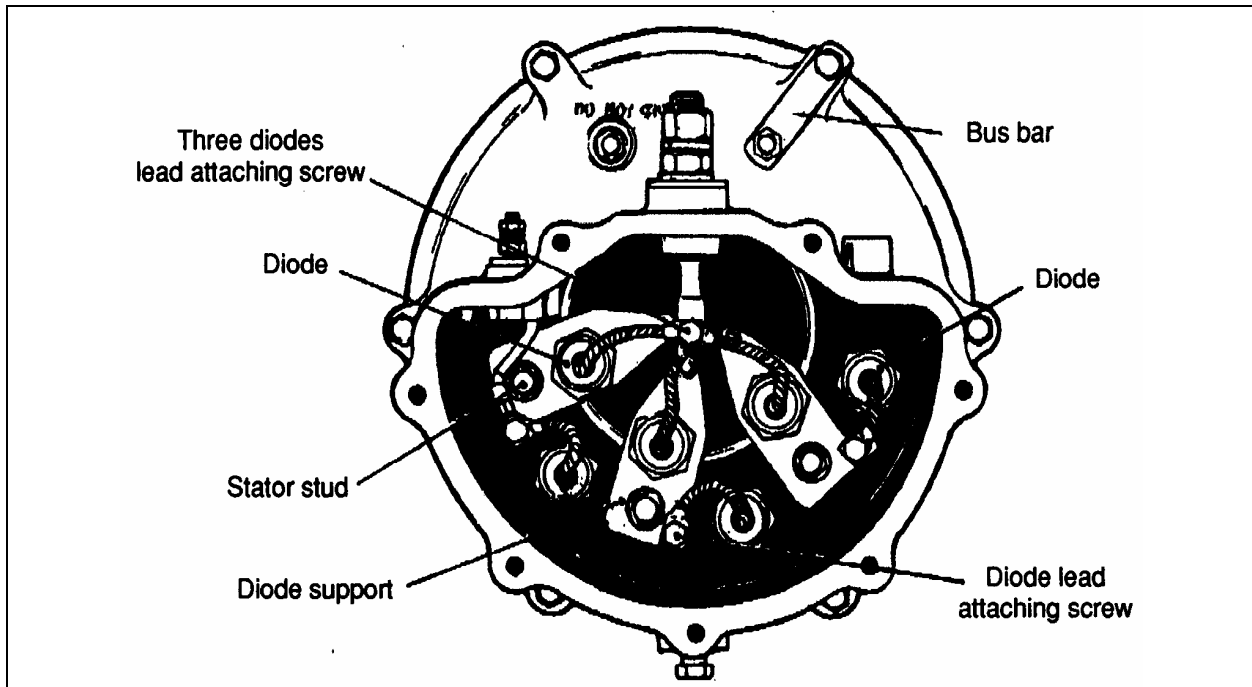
VIEW OF RECTIFIER END FRAME WITH COVER REMOVED
